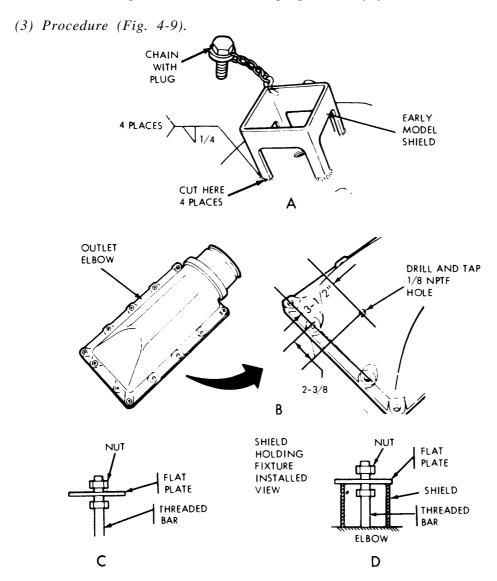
Air cleaner filter clog indicator rework (sheet 1 of 2).
